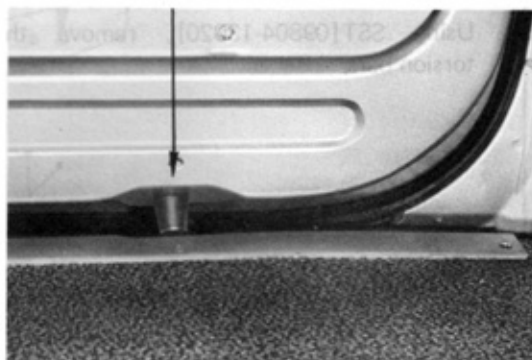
Back Door Side Stopper Adjustment (1)
